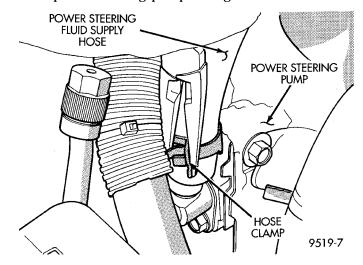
Power Steering Fluid Supply Hose At Power Steering Pump
